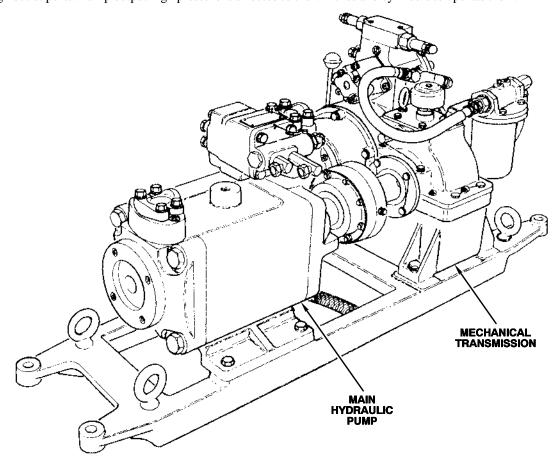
Mechanical Transmission and Main Hydraulic Pump Assembly—Left-Front View.
